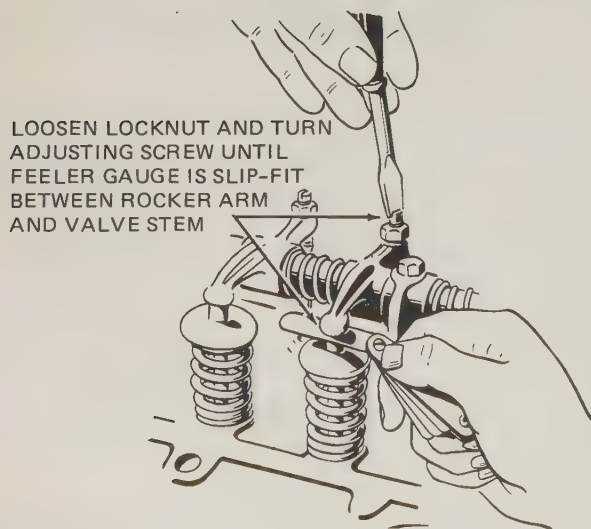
Adjusting valve-tappet clearance on an overhead-valve engine.
